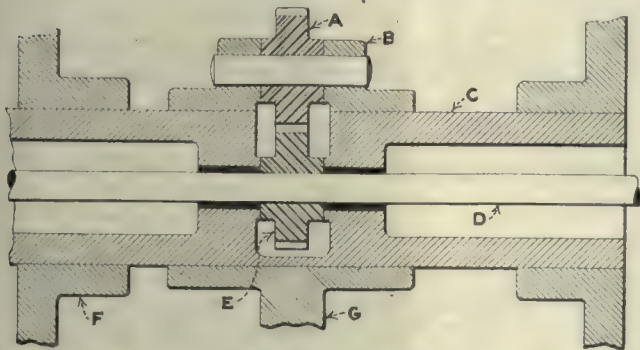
ARRANGEMENT OF TUMBLER FOR LIGHT MILLING MACHINE
